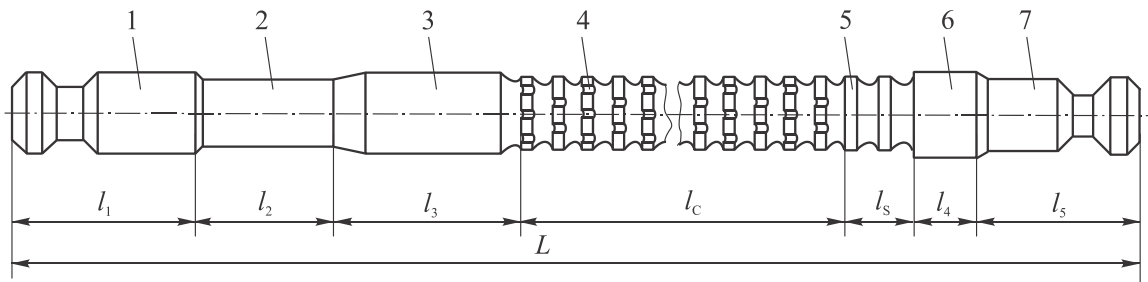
Construction of an internal broach: (1) pull-end; (2) neck; (3) front pilot; (4) cutting part; (5) sizing part; (6) rear pilot; (7) retriever
